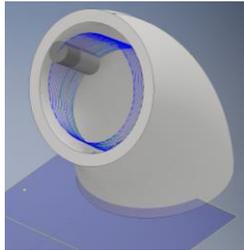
Hybrid 3D design of toroidal surface machined inside/outside
